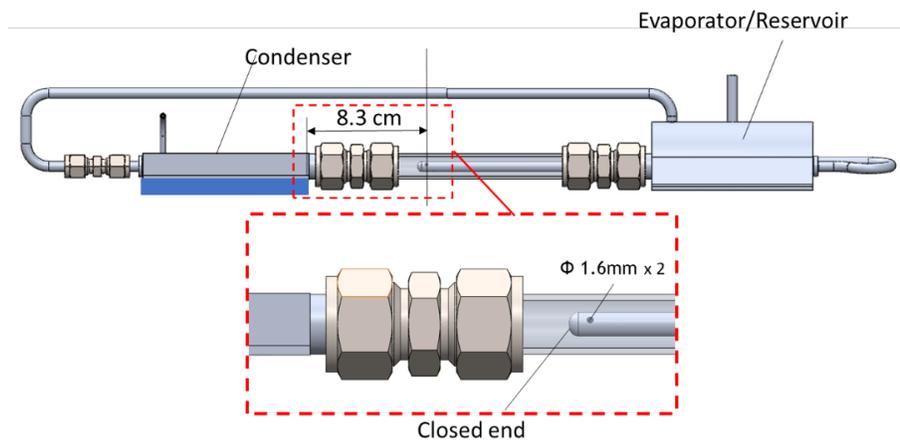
CAD of VCHP loop and detailed drawing of internal NCG tube design (two-hole Venturi style).
